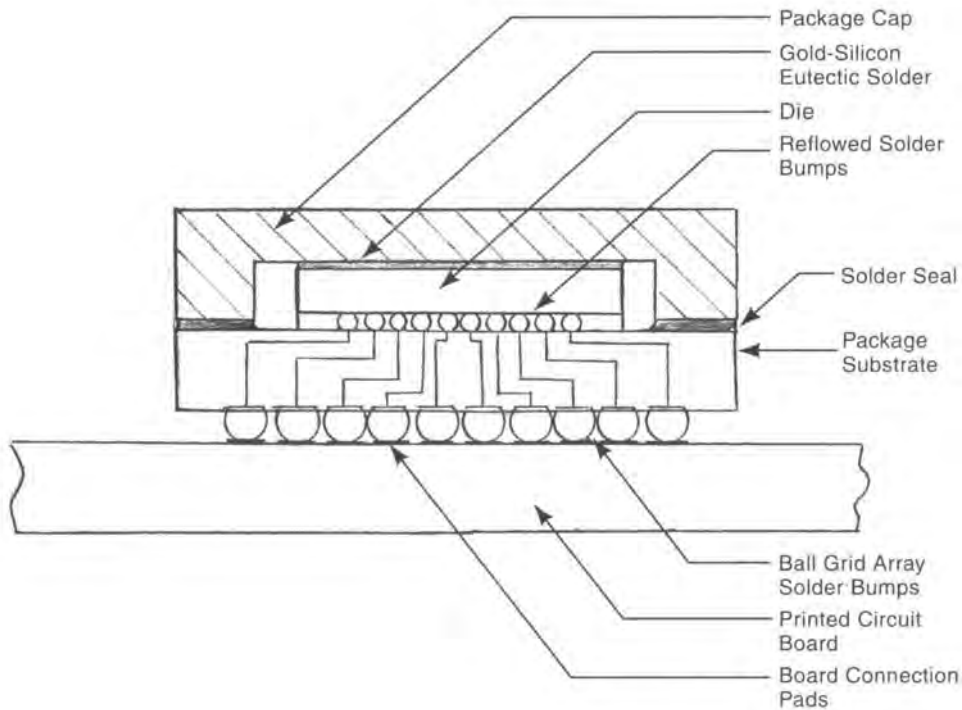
K6d Example of a flip-chip connected to a circuit board with a solder sphere ball grid array.
